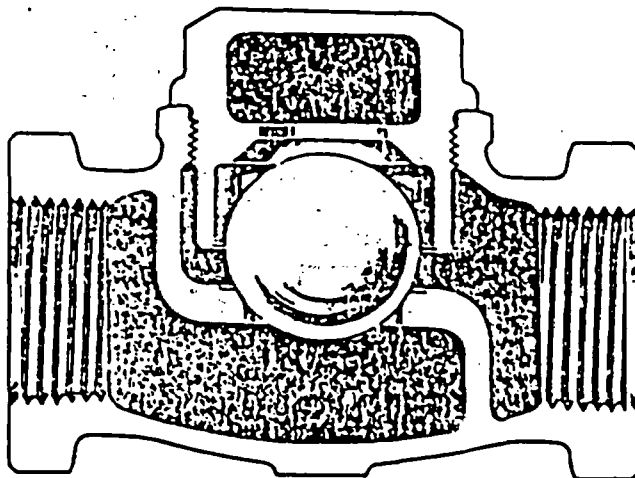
Ball CV, showing ball and seat arrangement.
